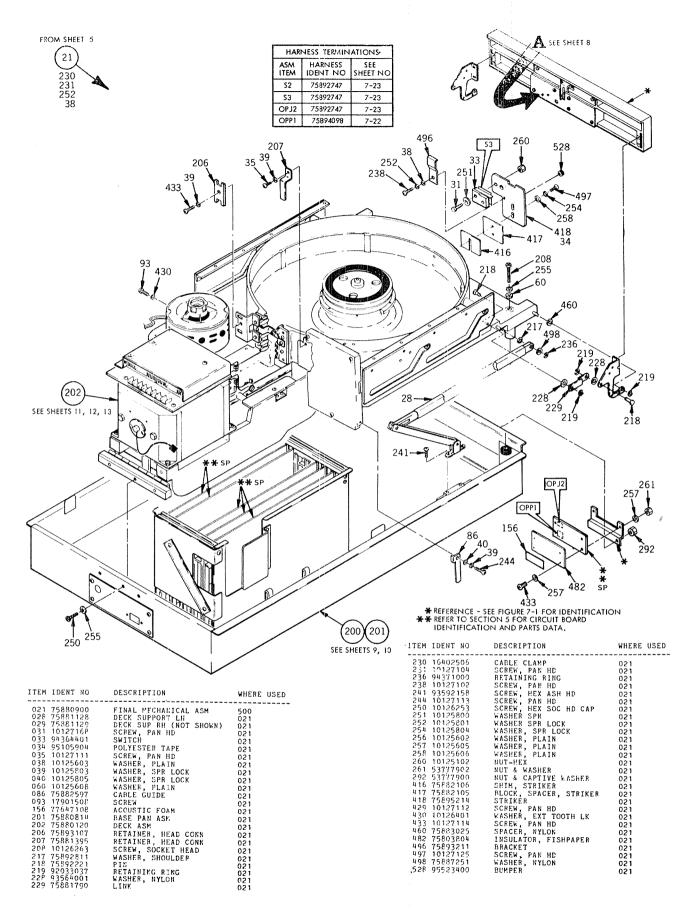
FINAL MECHANICAL ASM (SHEET 1 of 3)
